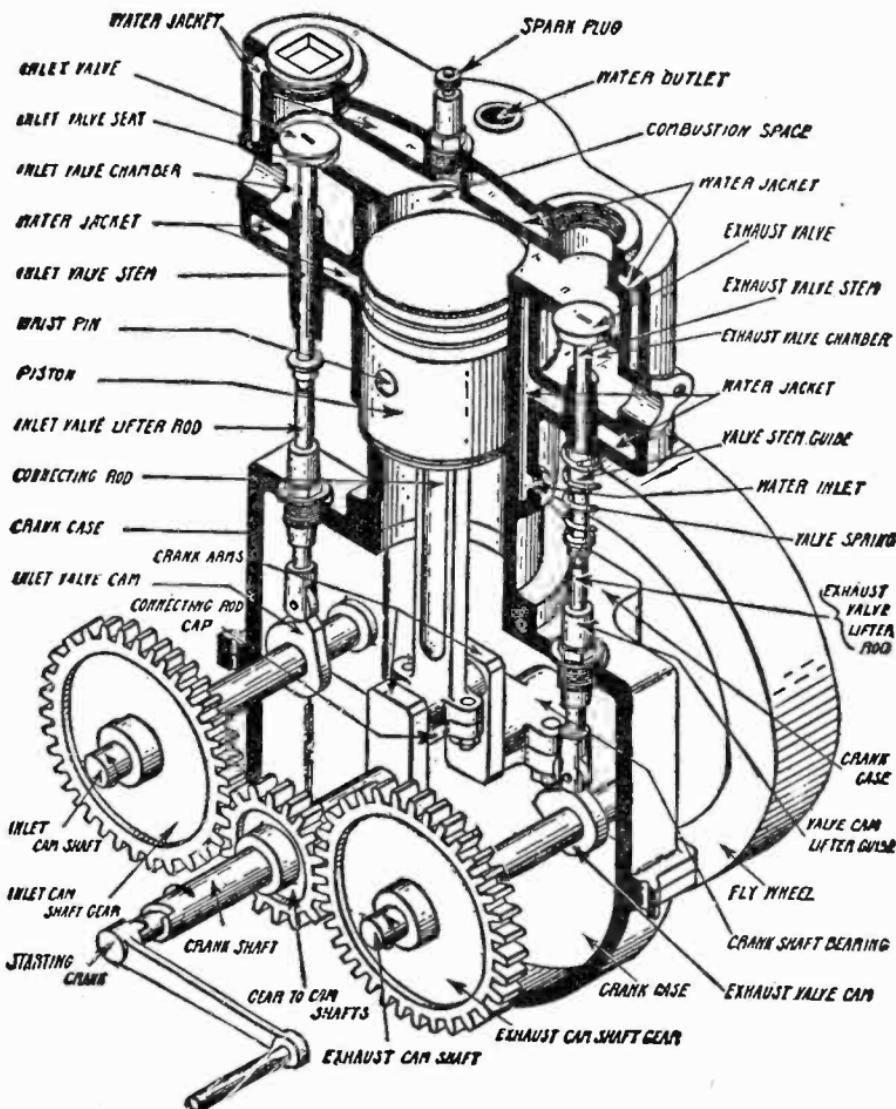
,963.—Sectional view of a four cycle gas engine, showing the valve gear and other working parts. Both inlet and exhaust valves are mechanically operated. The location of the valves diametrically opposite each other requires a separate cam shaft for each. These cam shafts are geared to the engine crank shaft and they make one revolution to every two of the engine. When the inlet valve is operated by a spring and the engine suction, only one cam shaft is necessary, as shown in fig. 6,967.
